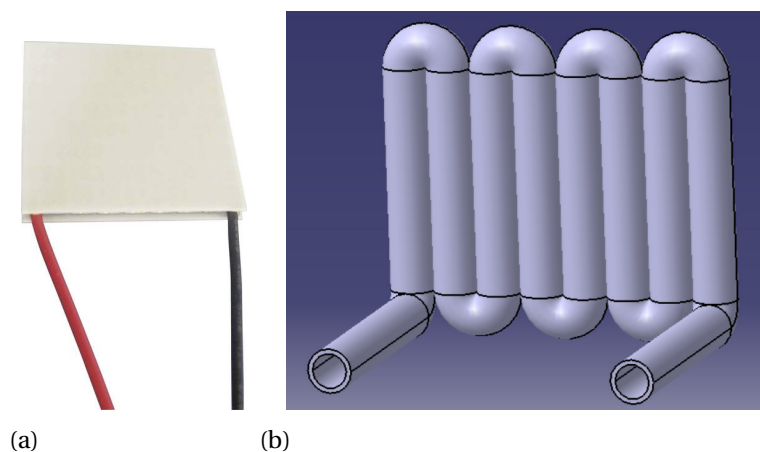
Components related to temperature control inside the printing chamber. a) a Peltier module [6]. b) Coiled pipe design.
